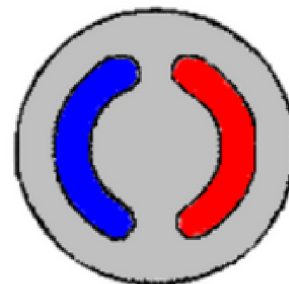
Port plate. The kidney shaped ports align with the inlet and outlet ports of the pump.
